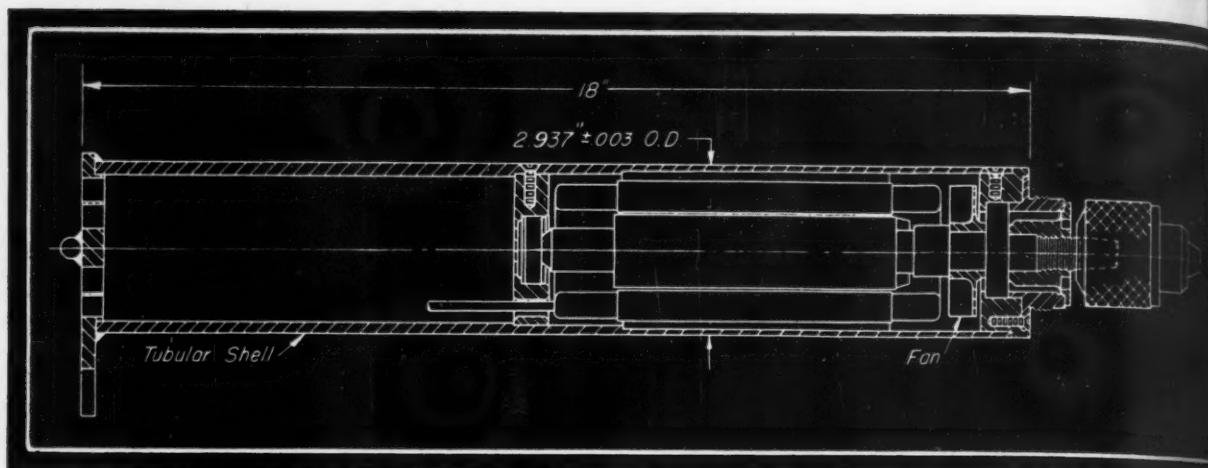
A special high-speed built-in power drill spindle which develops 2 hp at 15,000 rpm
